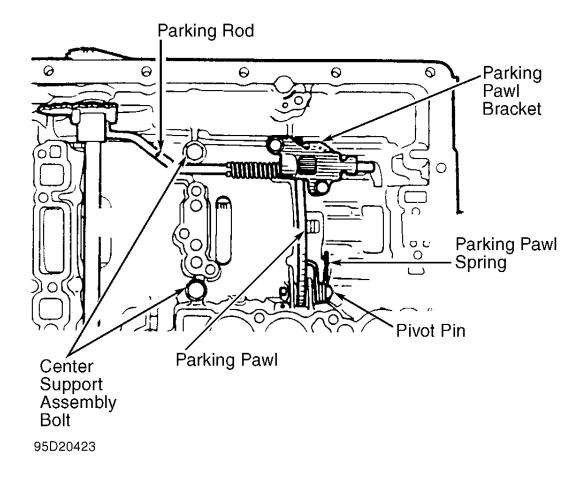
Parking Pawl Components & Center Support Assembly Bolts I.D. Courtesy of ISUZU MOTOR CO.
